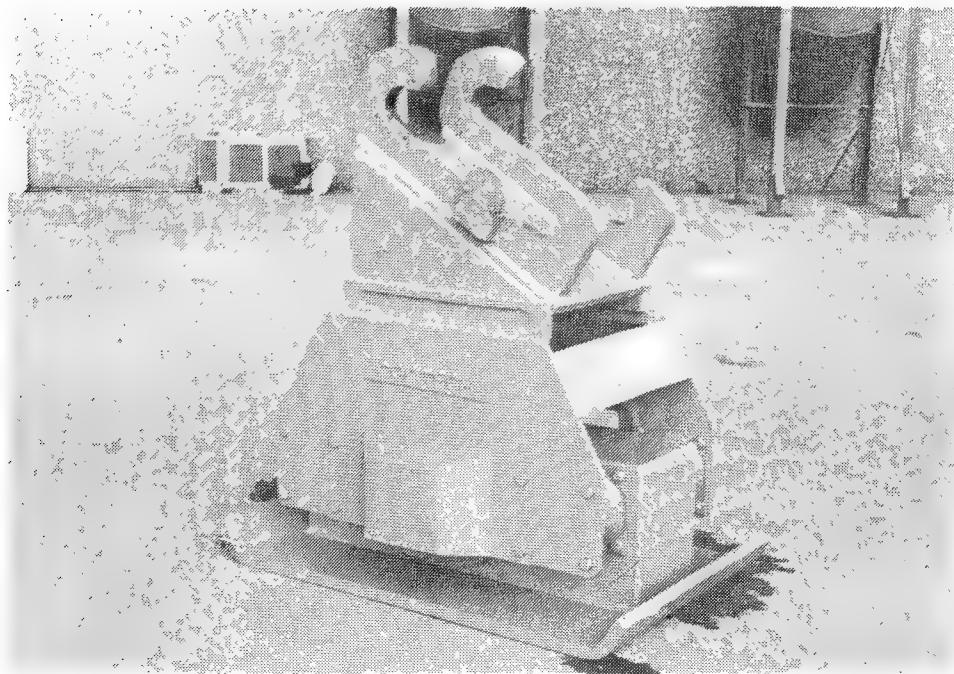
Ear Assembly Welded to Compactor.
